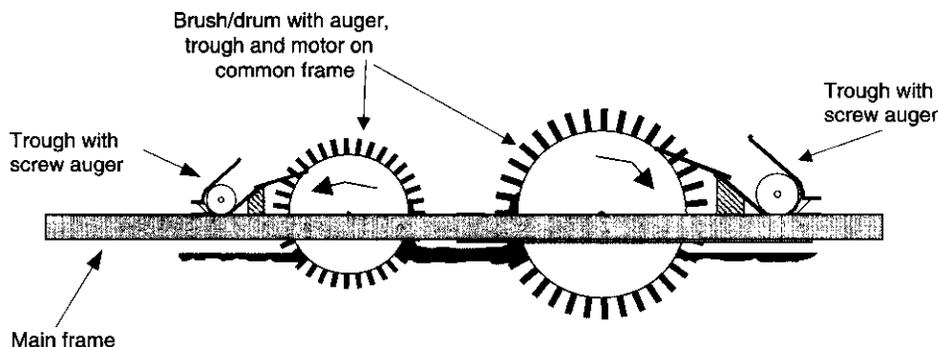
Brush-drum unit with large drum at front and small drum at the rear.
